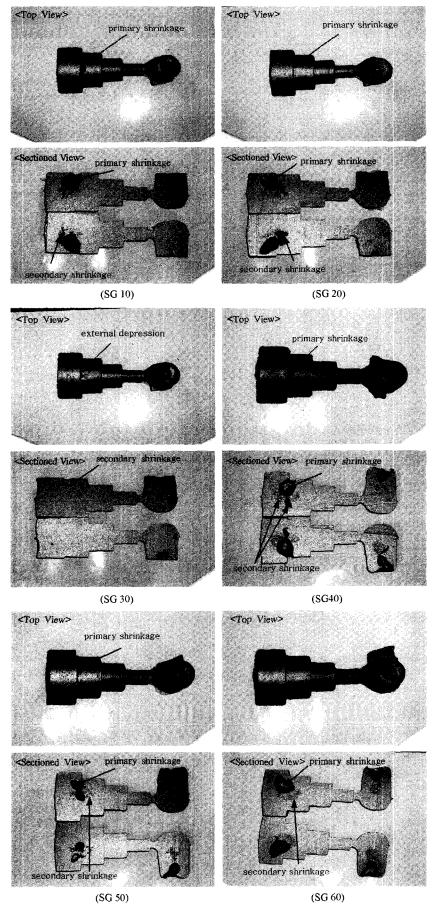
Top and sectioned views of the six specimens in the No. 1 risering design.
